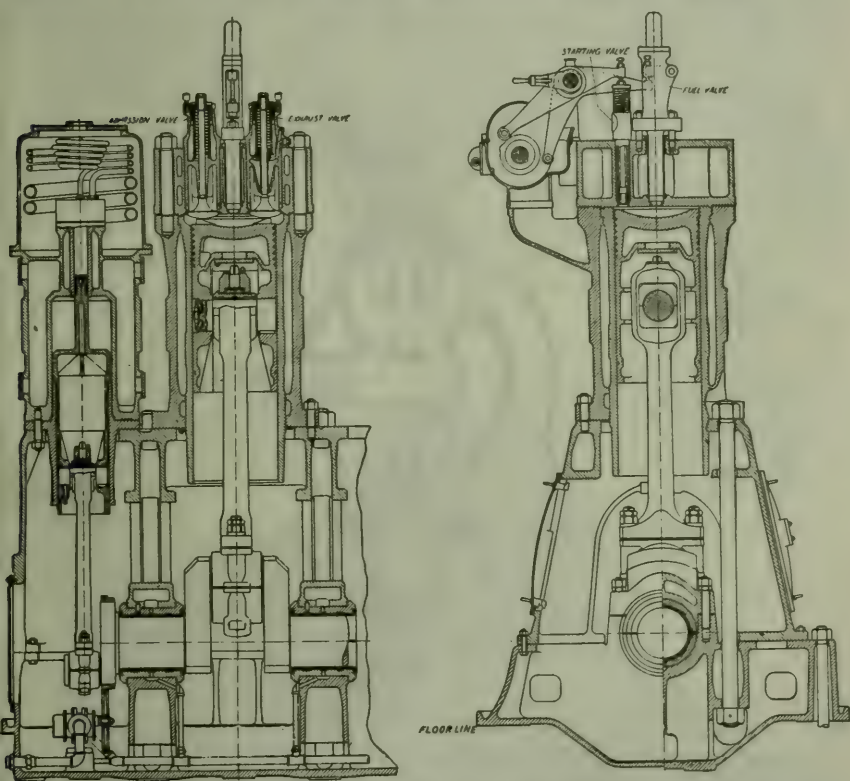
Two sectional views of Diesel engine built by Busch-Sulzer Bros. Diesel Engine Co.
